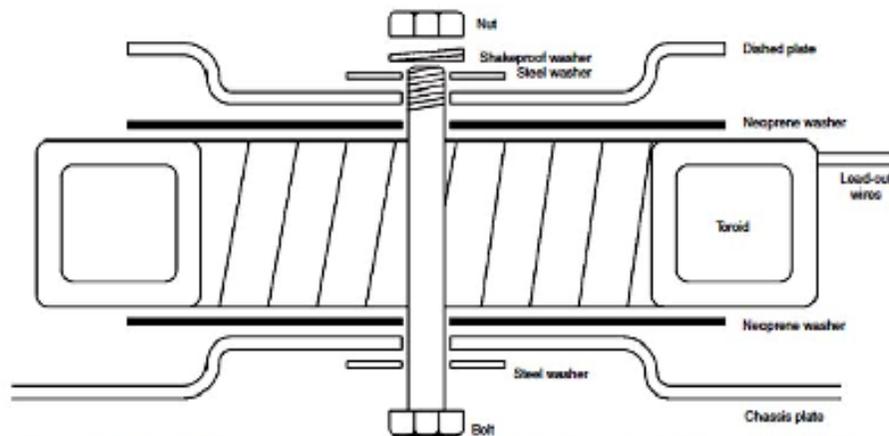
Toroidal transformer mounting. For clarity the fixing bolt is partly withdrawn
